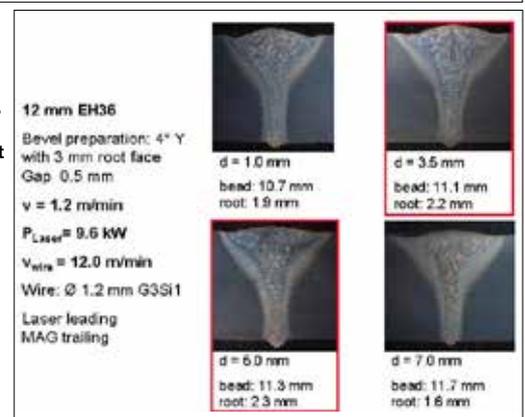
The wide parameter range of hybrid laser welding optimised for weld efficiency. Boxed conditions represent the most efficient welds.
